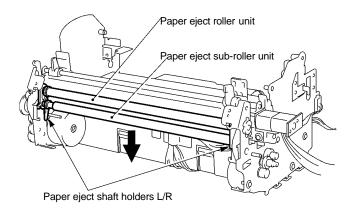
Removing the Paper Eject Sub-roller Unit
